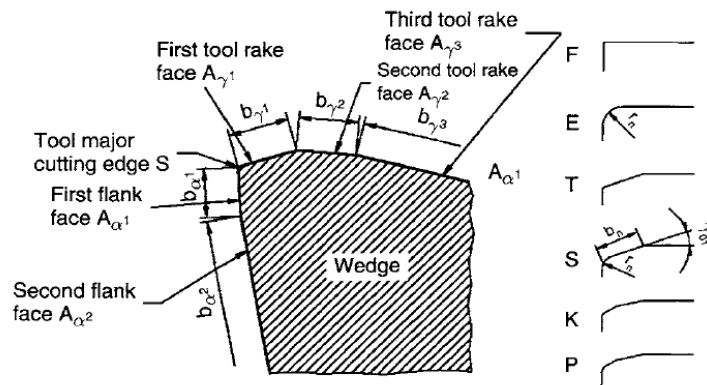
General geometry of a cutting tool and variants of cutting edge shapes, in courtesy of Elsevier [15]
